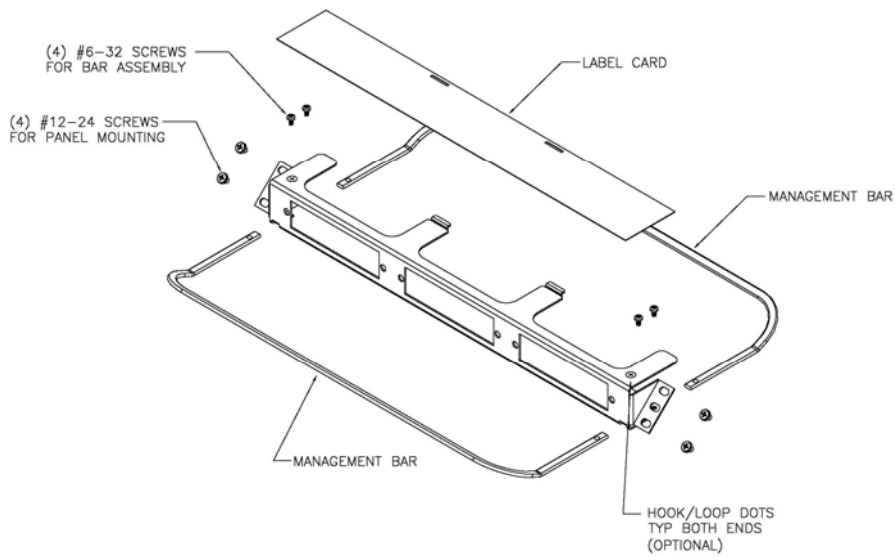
1U Raised Floor Fiber Patch Panel Detail (2U Similar)
